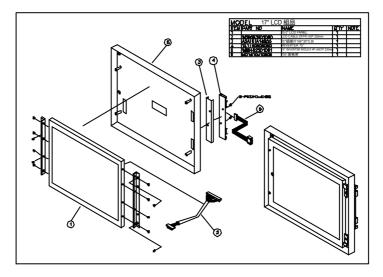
ODYSSE 170 LCD MODULE ASSEMBLY
